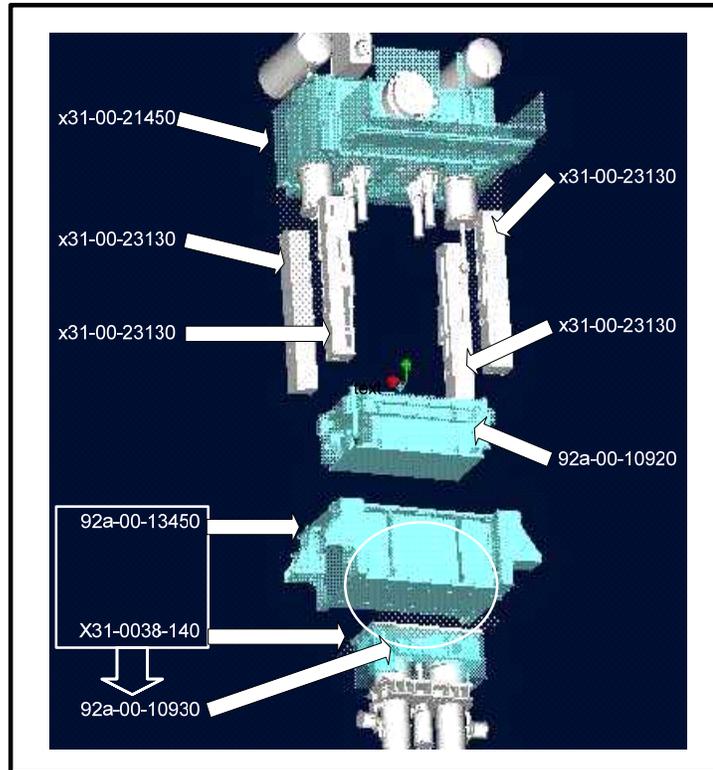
Exploded Pro/E Assembly Model X31-00-21440 of Large Press Machine
